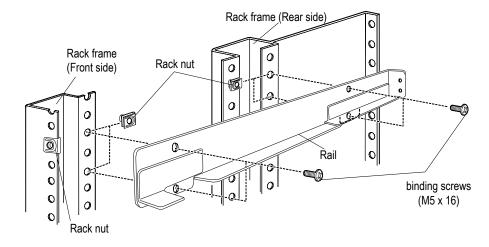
Installing the Rail (RK40 rack frame)
